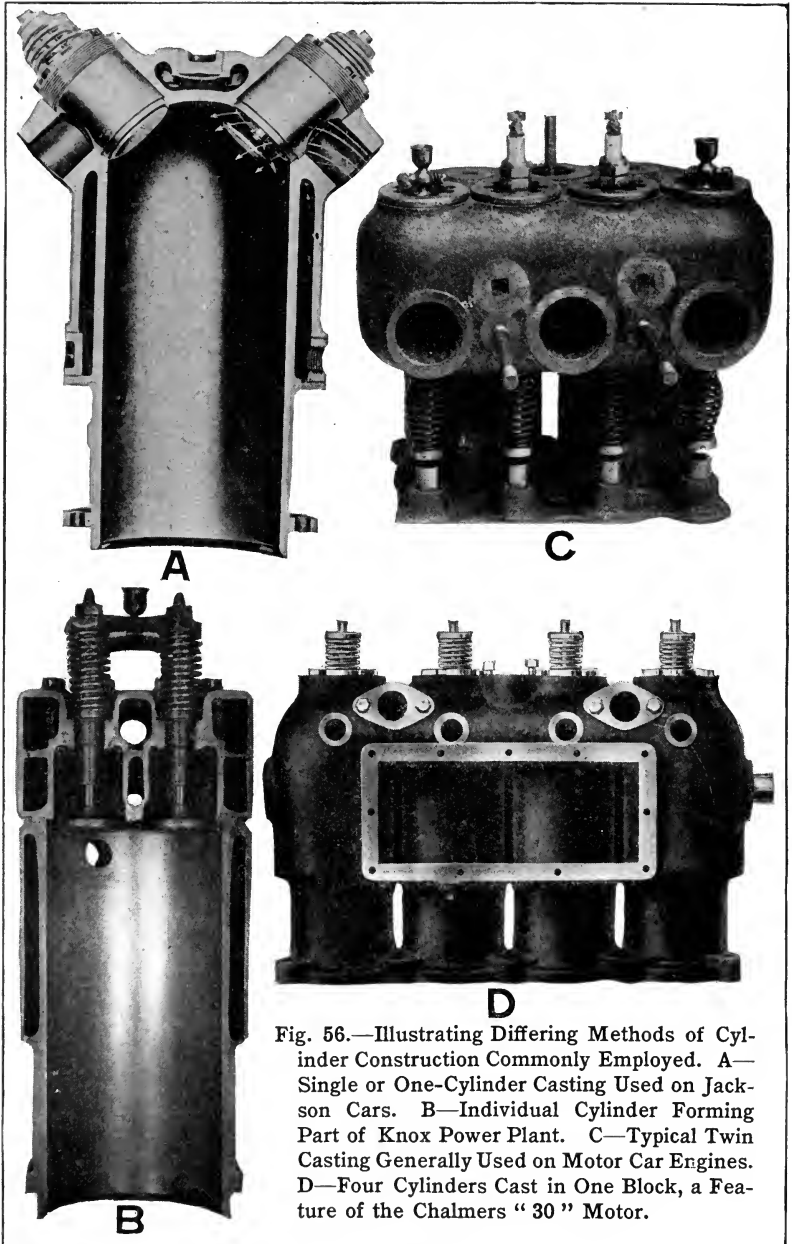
Illustrating Differing Methods of Cylinder Construction Commonly Employed. A—Single or One-Cylinder Casting Used on Jackson Cars. B—Individual Cylinder Forming Part of Knox Power Plant. C—Typical Twin Casting Generally Used on Motor Car Engines. D—Four Cylinders Cast in One Block, a Feature of the Chalmers "30" Motor.
